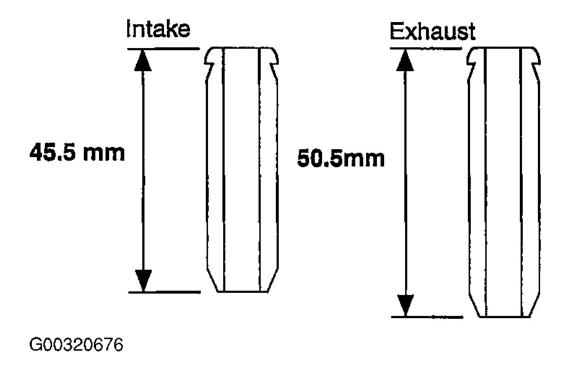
Measuring Valve Guide Length Courtesy of KIA MOTORS AMERICA, INC.
